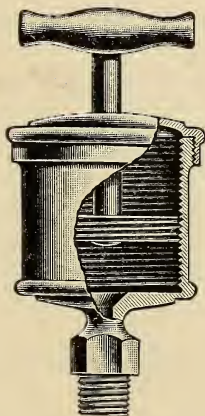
Screw feed marine grease cup. This cup is designed for the main bearings of marine engines, but will also be found suitable for other purposes where a screw feed is desired, such as for forcing grease some distance to the parts to be lubricated.
